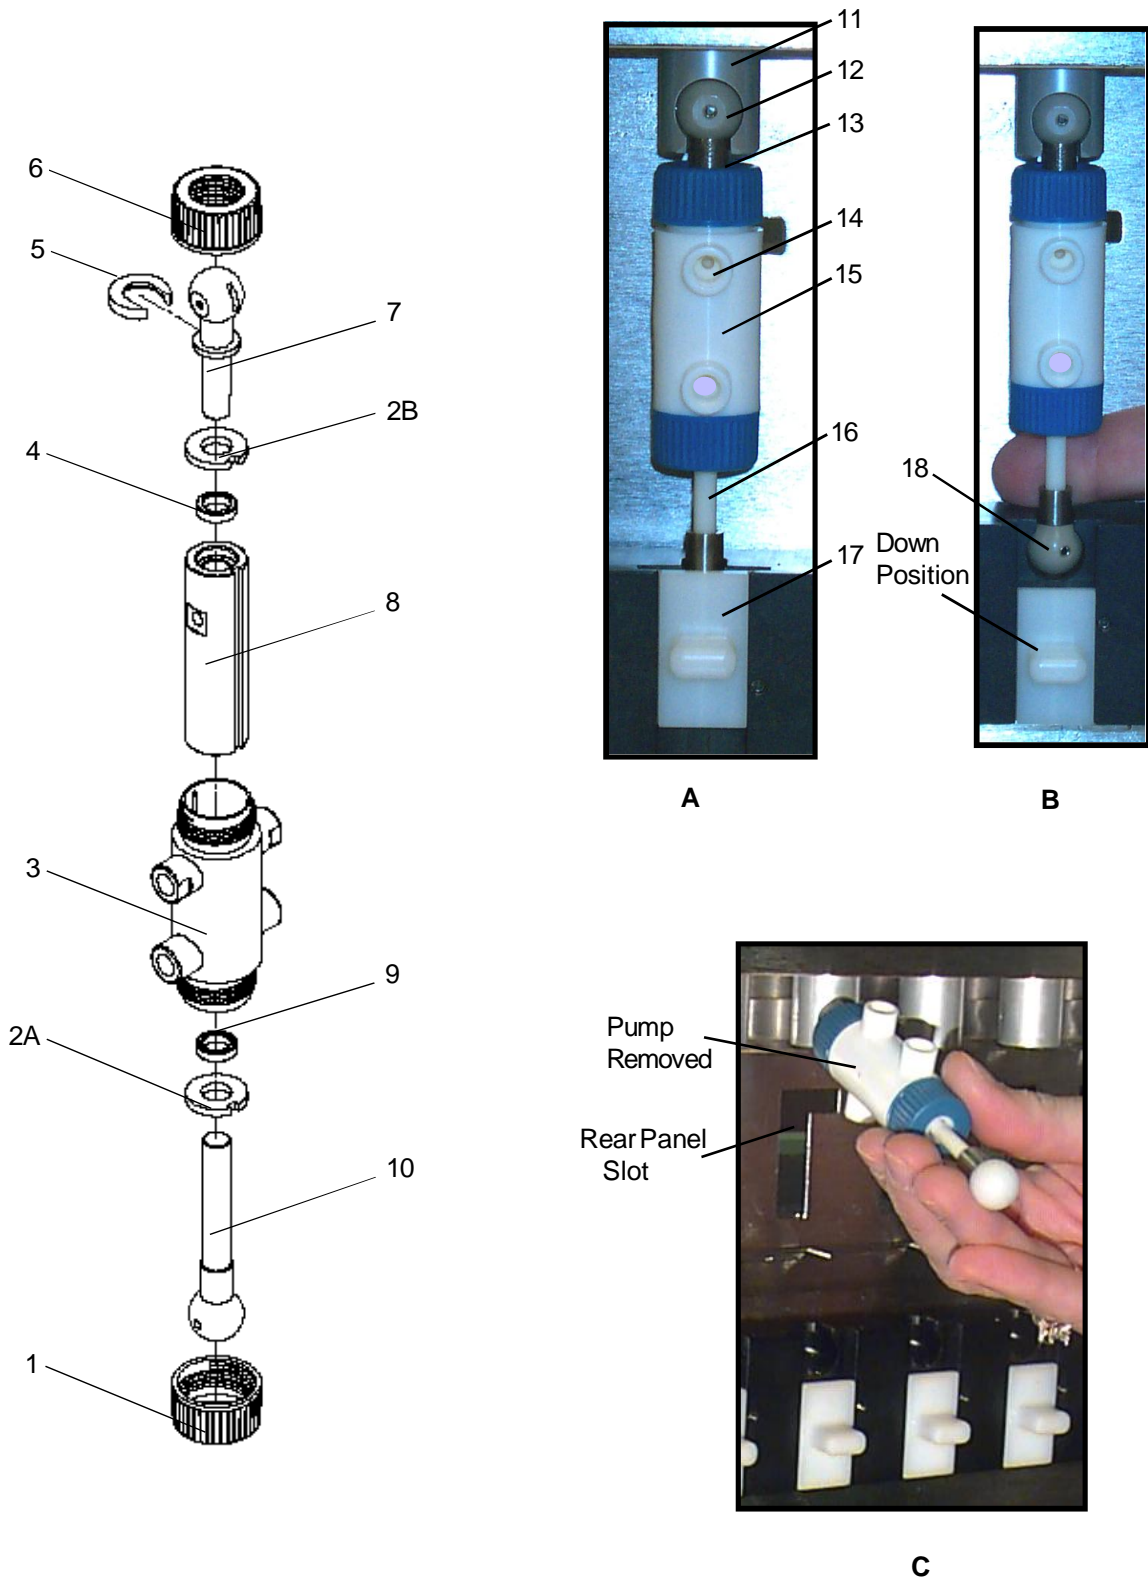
SF Multiplex Pump Module Assembly/Disassembly
